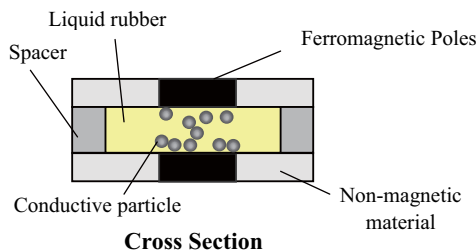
Schematic drawing of the anisotropic conductive sheet-forming mold .
